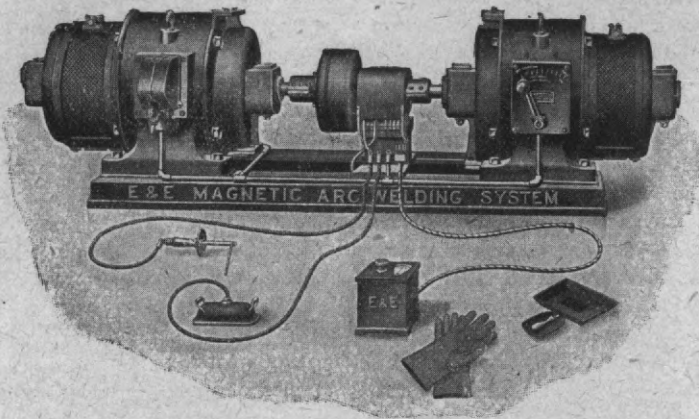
MOTOR GENERATOR WITH CLUTCH FITTED.
